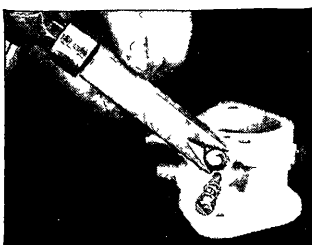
Remove idle adjustment screw and spring, then idle port rivet plug
